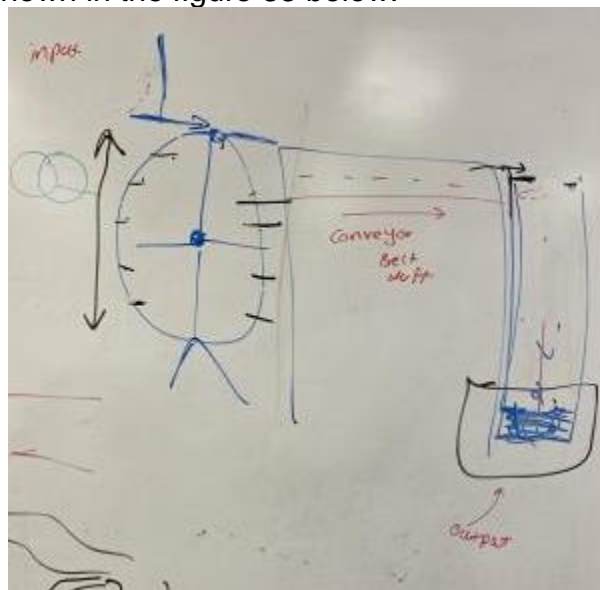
Ferris wheel cyclical queue stacking mechanism
